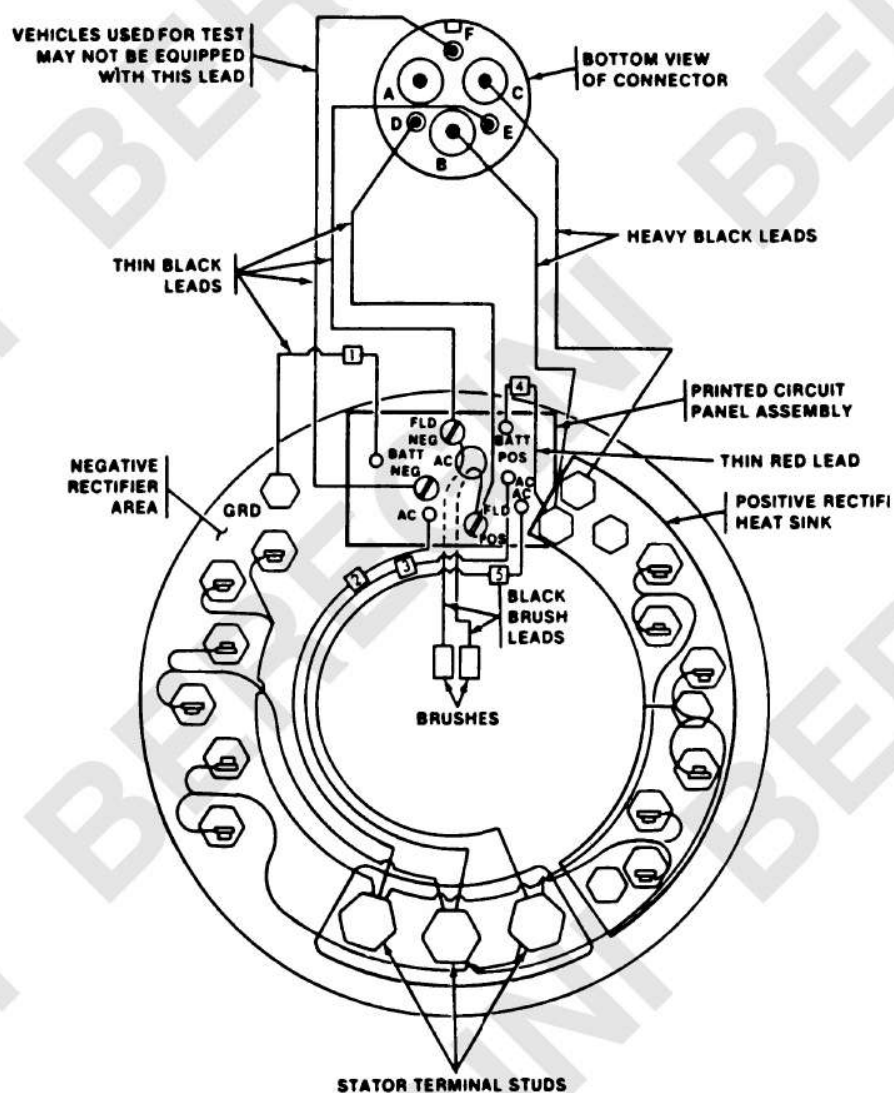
Drive End Housing Assembly Interconnection Diagram.
